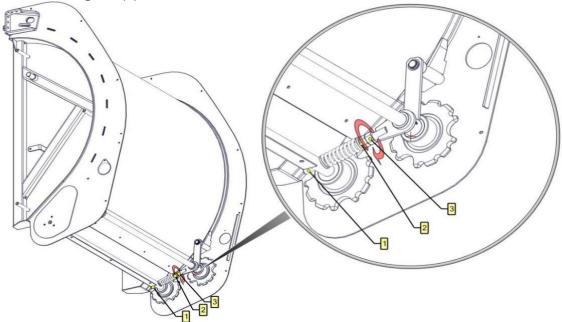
Adjusting the tension of the chain and rod conveyor set of the Z587/1 baler
